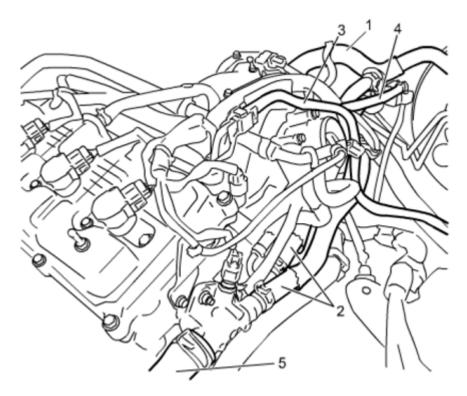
Identifying Fuel Hose And EVAP Canister Purge Hose Courtesy of SUZUKI OF AMERICA CORP.
